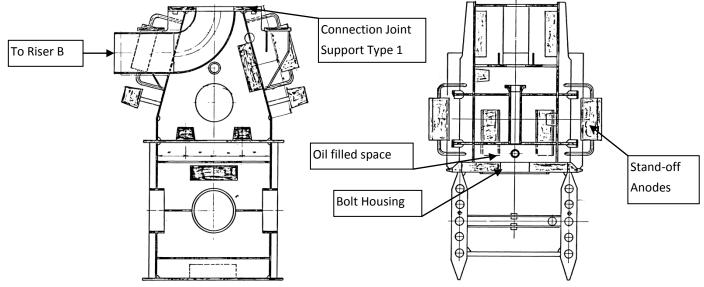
Locking bolt housing and connection Joint support type 1 [35]
